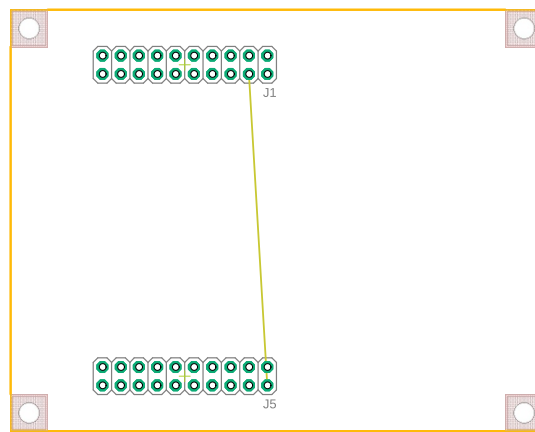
Board layout of a placeholder design block for a TI LaunchPad™ [11].
